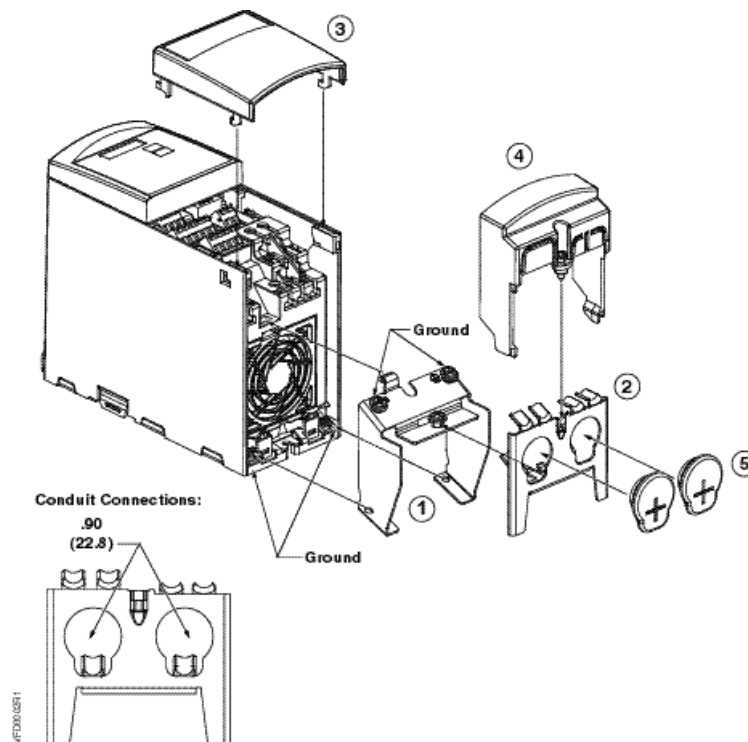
Frame Size A Gland Plate Installation and Conduit Connection Diameters in Inches (Millimeters).
